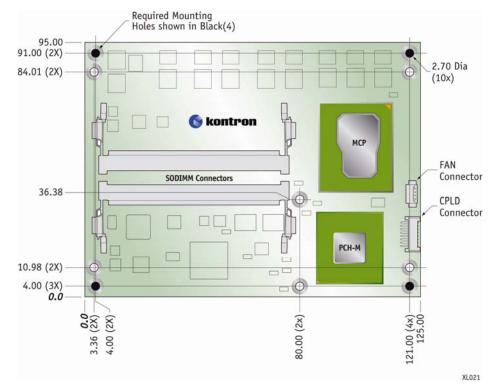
ETXexpress®-AI COM Mechanical Drawing
